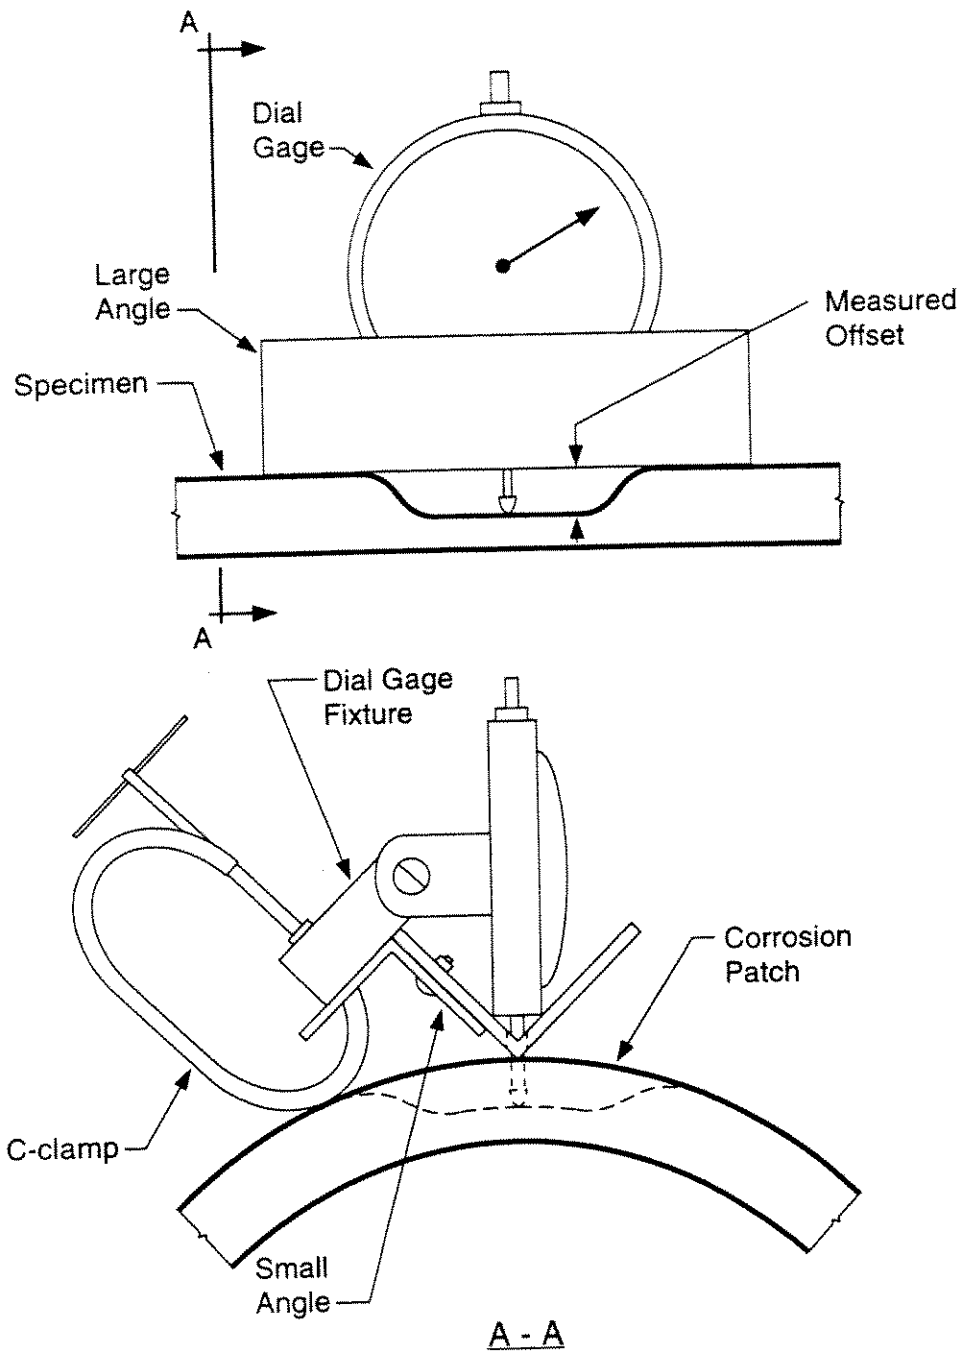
Frontal and Cross-Sectional Views of the Angle Tool
